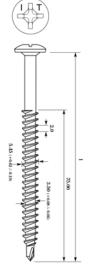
ISO-TAK Steel Deck Screw BS 55 - Ø 5,5 mm, tempered steel SHE 1022, drill point, trumpet head, Ph 3 with drill point and trumpet cross-head
